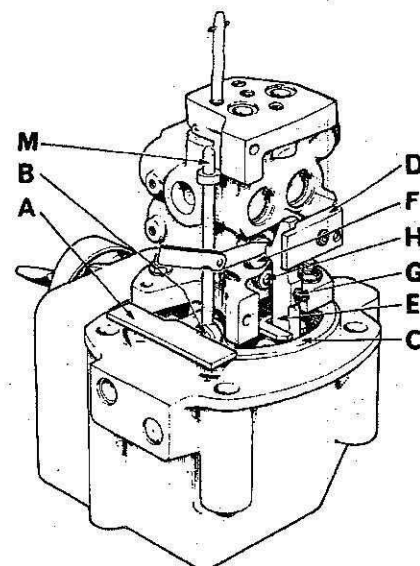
Using adjusting gage to check setting of abutment plate (D); refer to text for procedure.
